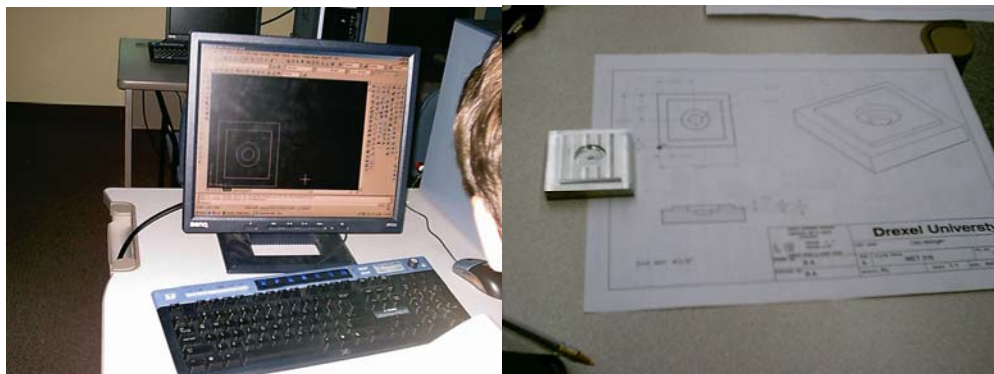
CAD drawing of square aluminum plate produced with AutoCAD
